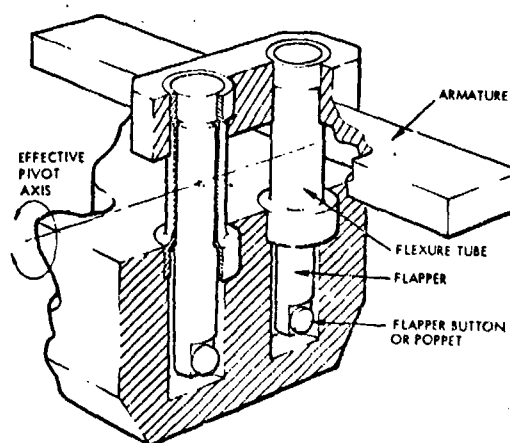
Flexure Tube Mounting of Bipropellant Valve Torque Motor
